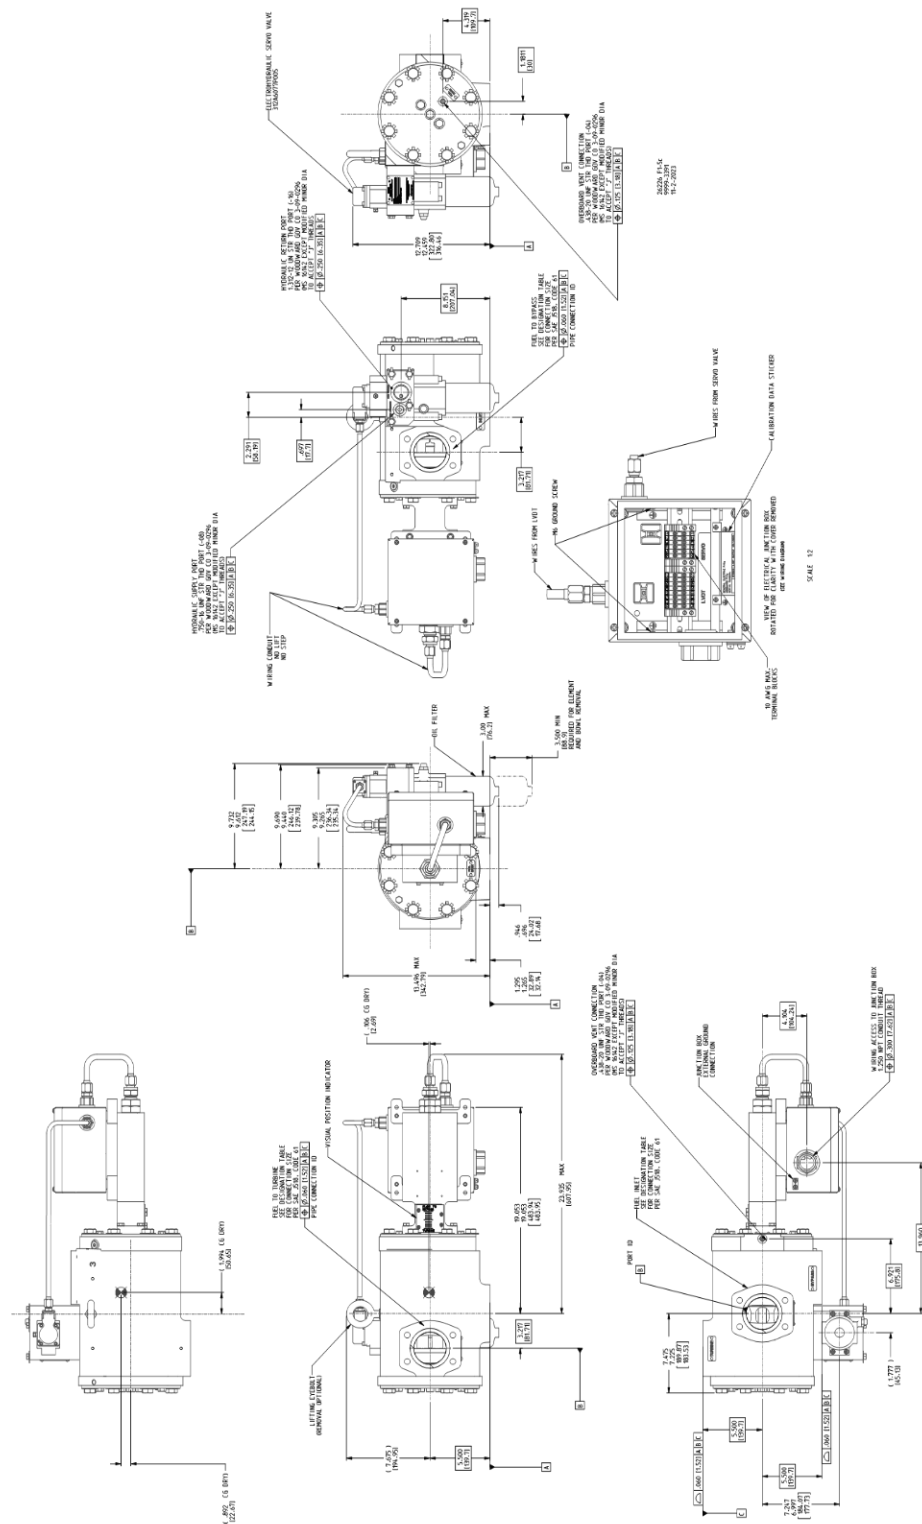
Outline Drawing—Bypass Valve with Integrated LVDT, SST Junction Box
